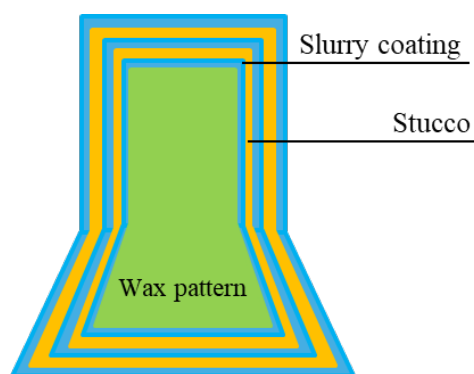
Schematic illustration of the investment casting mould built up on the wax pattern with alternating slurry and stucco coatings.
